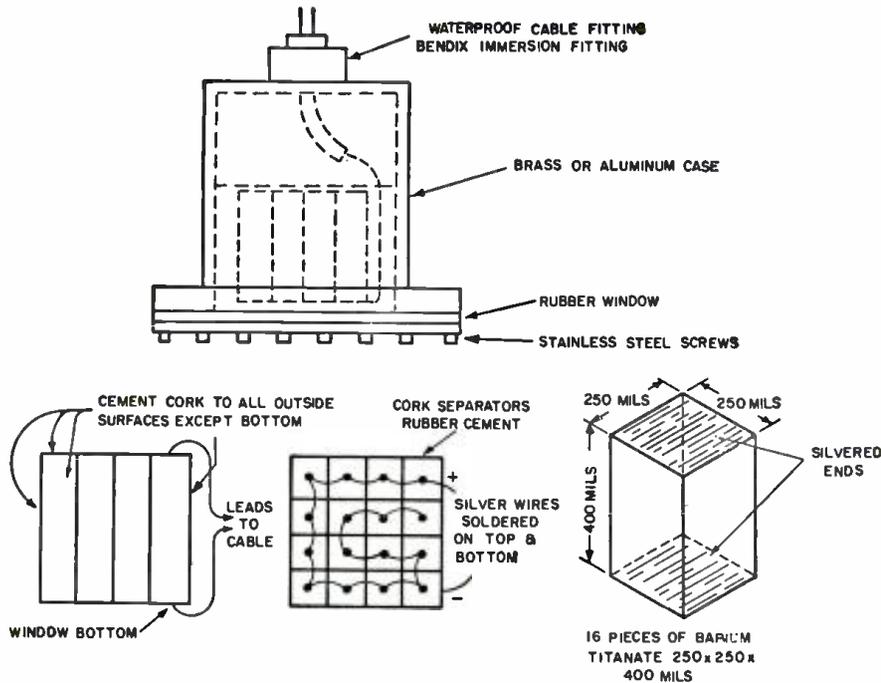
Mechanical details showing the construction and assembly of transducer.
